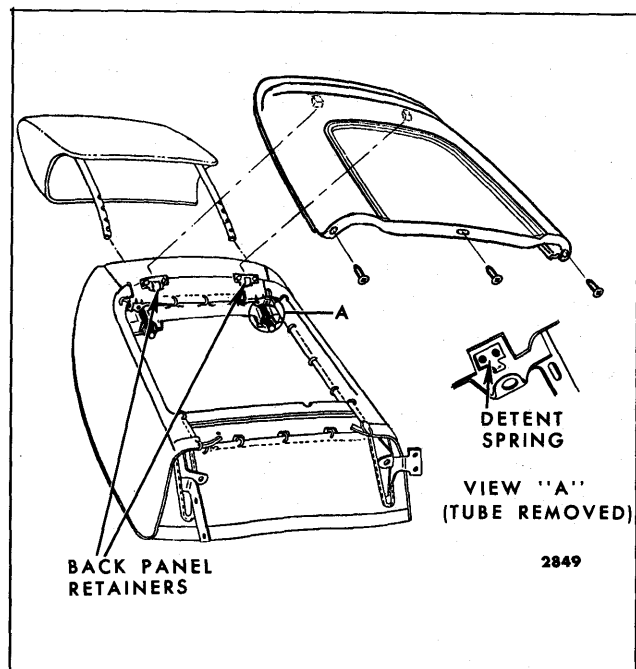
Strato Seat Back Panel and Head Restraint
